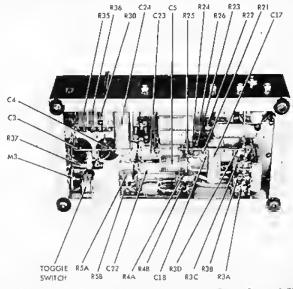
Bottom View Showing Ports Located in Fron: Port of Chassis.
